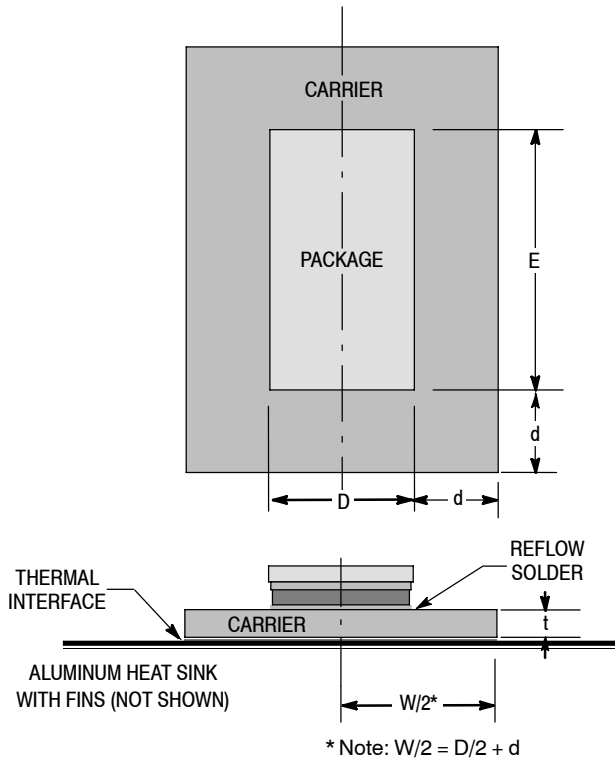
Typical Carrier Inserted between Device and Aluminum Heat Sink
